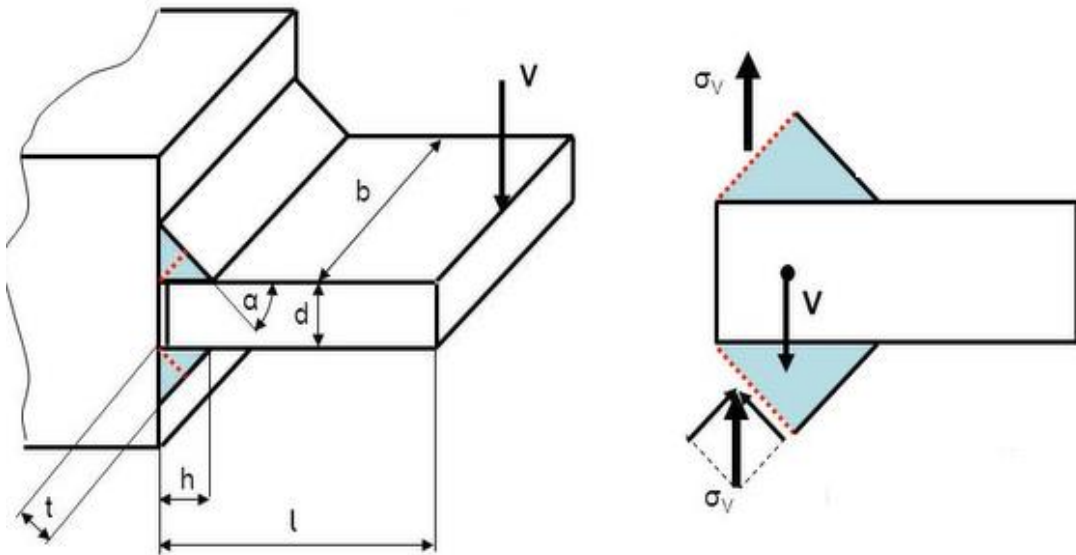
Fillet Welds under Primary Shear and Bending Load (t = weld width, mm, b = weld length, mm, l = lever arm length, mm, d =plate thickness, mm, V = applied force, N , τ = shear stress, MPa) [31]
